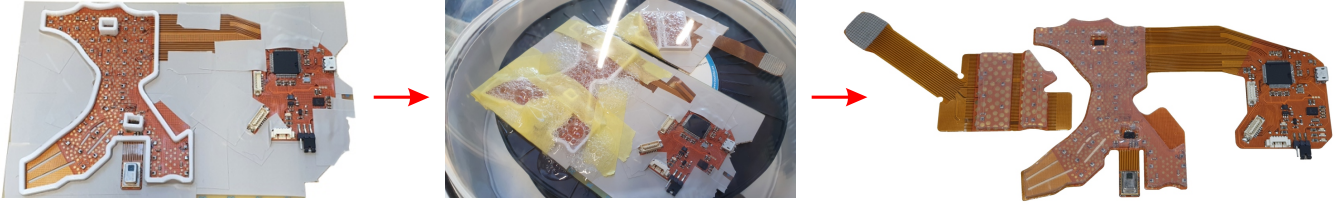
Casting the silicone rubber. (left) Plastic frames help to contain the silicone only in desired areas. (middle) De-gassing the silicone rubber in a vacuum chamber after casting. (right) The palm sensor with a 3 mm thick rubber layer after degassing and silicone drying, ready to be mounted onto robotic hand.
